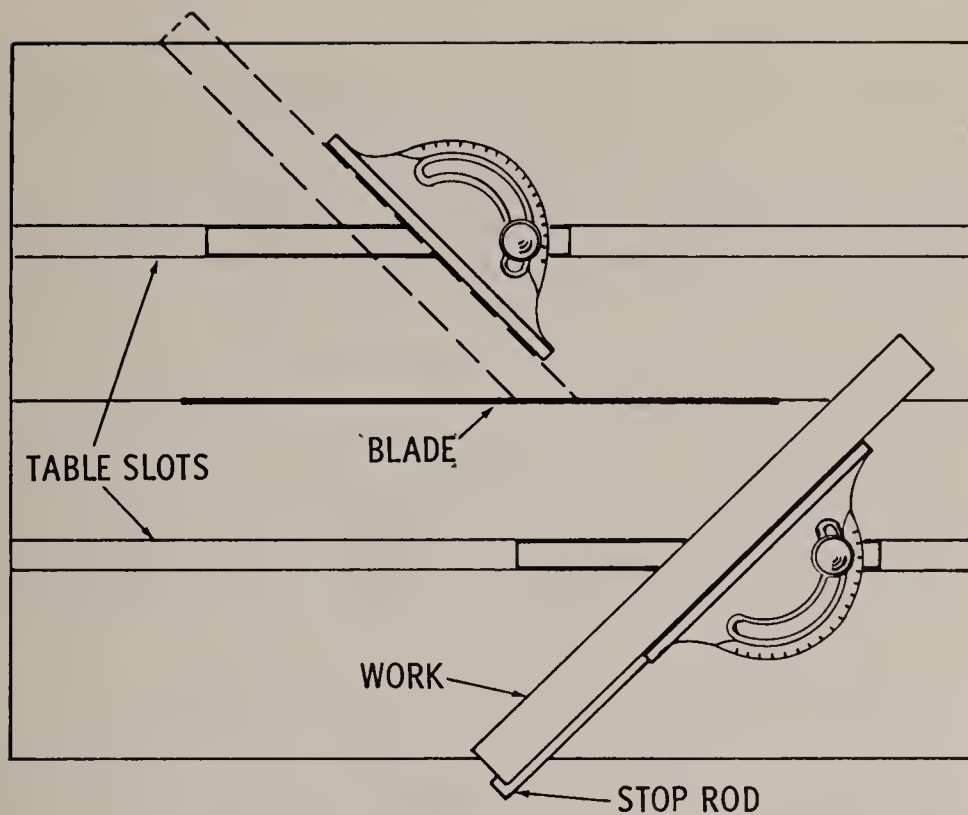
Cutting miters by use of two miter gauges. When using a setup of this sort, the first cut is made to right of saw blade. The end is butted against stop rod on miter gauge to left of saw blade and a second miter cut is made.
